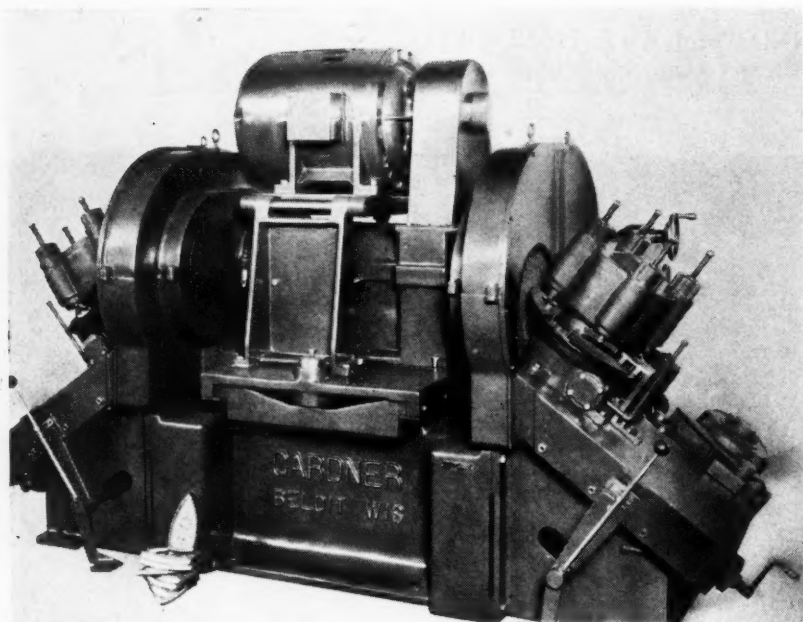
Grinder Especially Built for Grinding the Beveled Edges of Sad-iron Sole Plates on a High-production Basis
